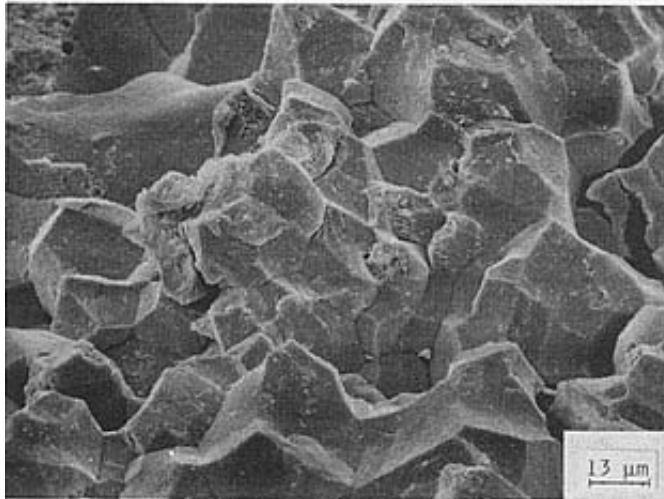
Corrosion cracks by intergranular stress corrosion cracking (SEM picture)
